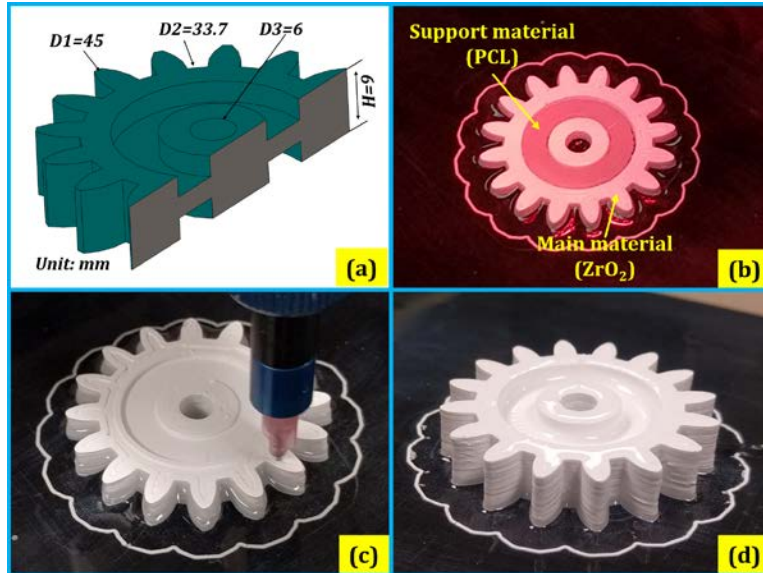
Printing of a spur gear sample part: (a) CAD model, (b) & (c) Part being printed, (d) Part printed completely.
